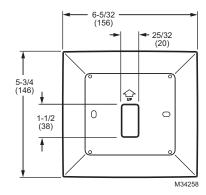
Dimensions of VisionPRO cover plate in in. (mm).
